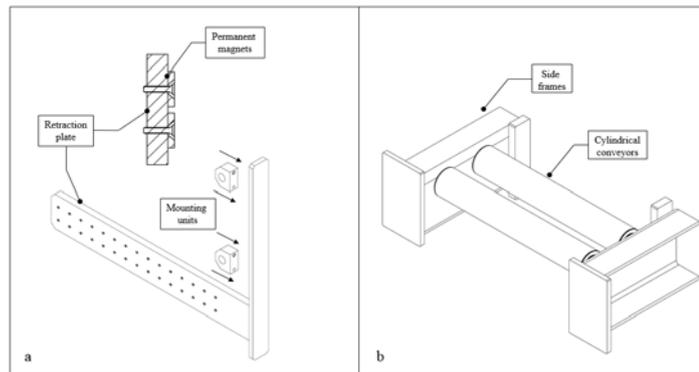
a) Retraction assembly and section view and b) cylindrical rollers (McMaster-Carr 2015g, p. 1308).
